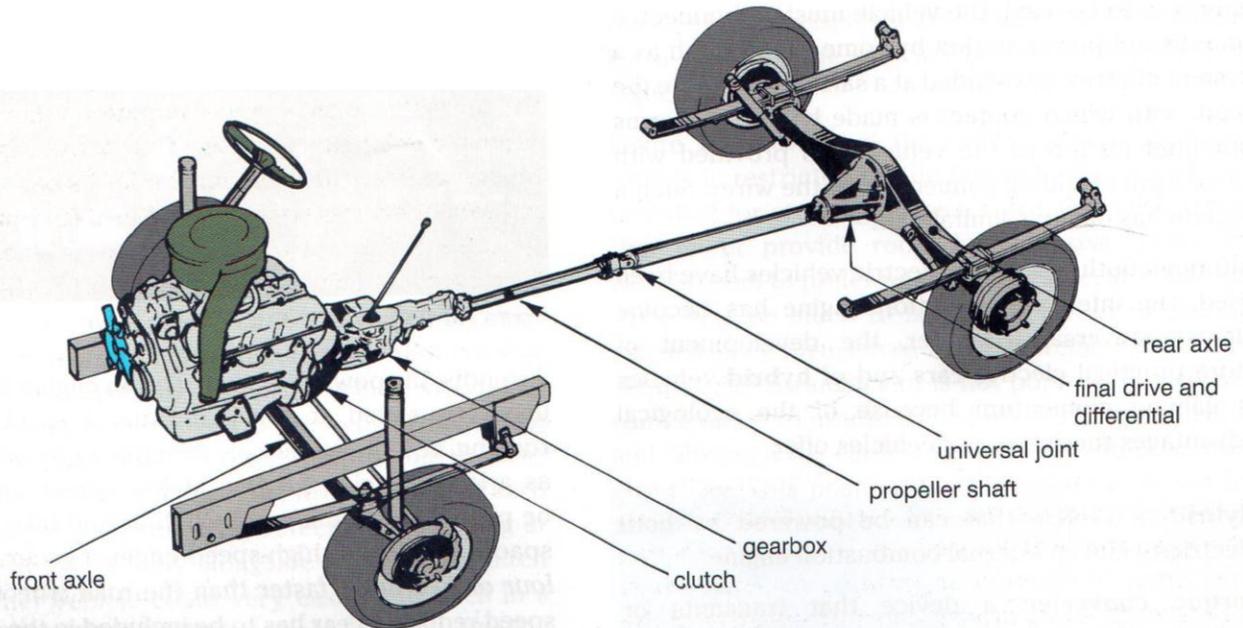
Layout of mechanical systems (simple front-engine, rear-wheel drive layout)
